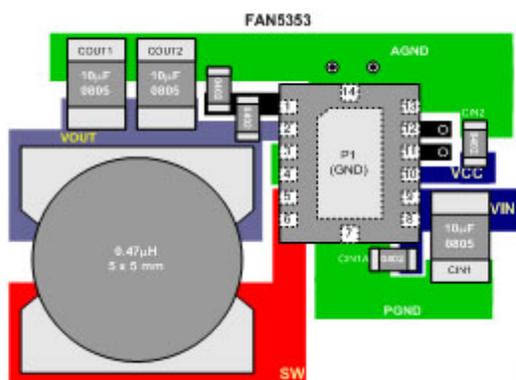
Optimized Board Layout Achieves <65 mm² with 5x5 mm inductor.
